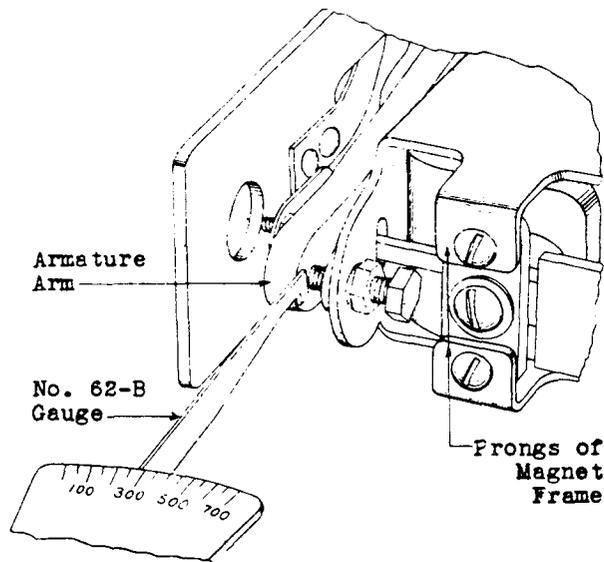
Method of Gauging Combined Armature Spring Tension
